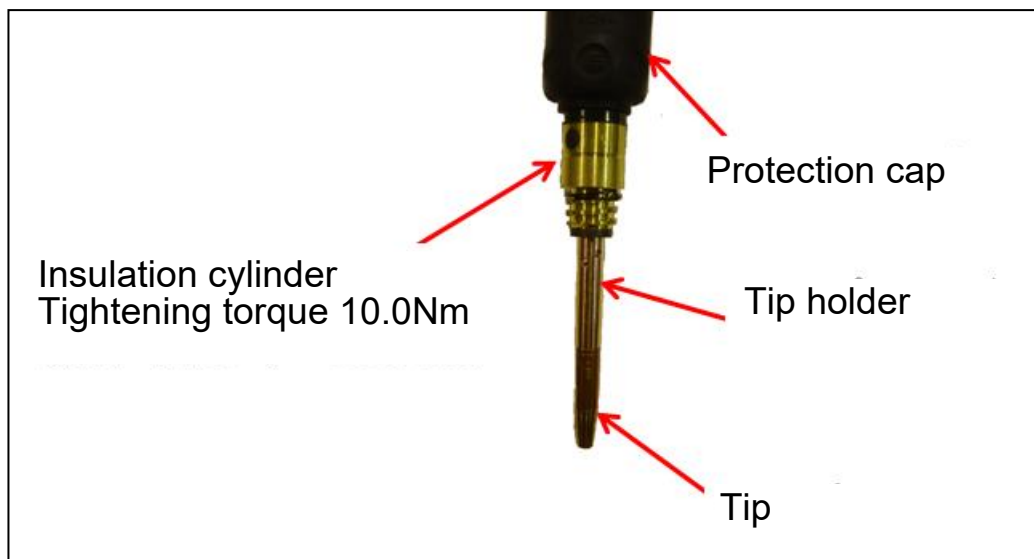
(b) Removing the insulated cap and the tip holder
